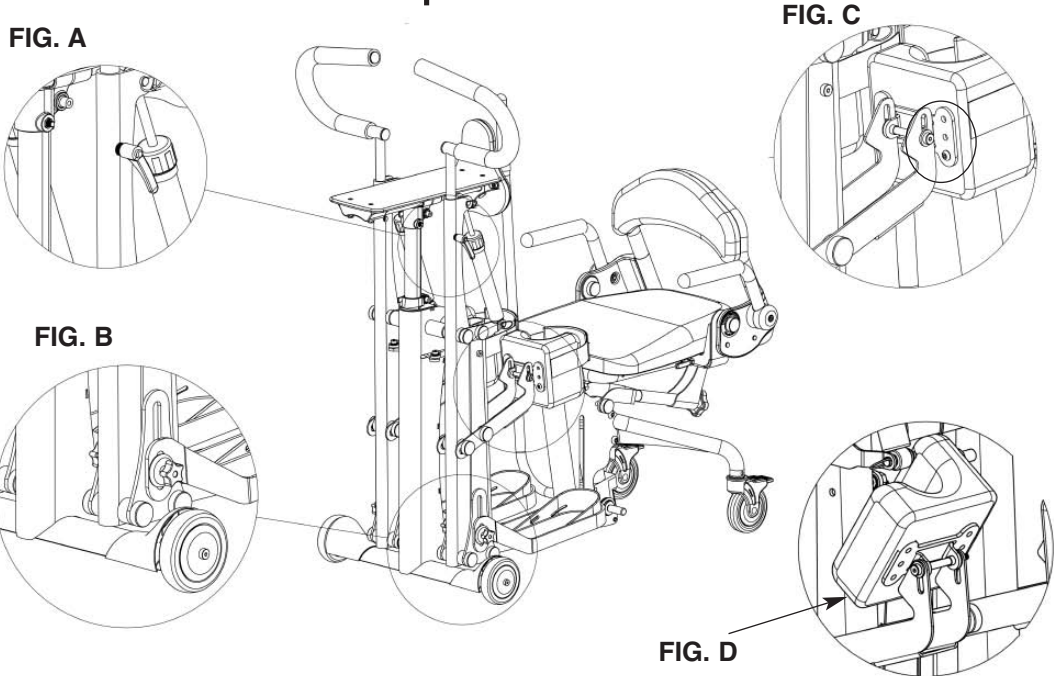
FIG. A- To adjust the height of the glide handles, loosen each clamp. Adjust the handles to the user's desired position and tighten the clamps.
